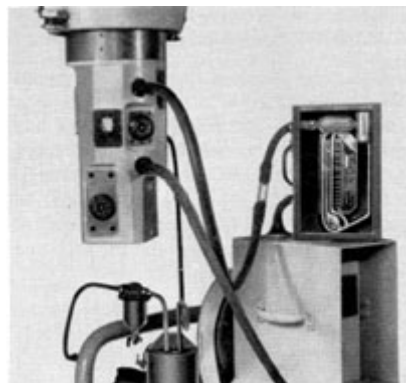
Mercury manometer fitting in air inlet connection and evacuating fitting in air outlet connection.
